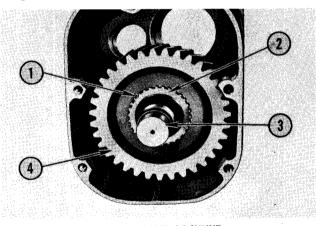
OUTPUT GEAR AND LOCKNUT 4. Gear 2. Locknut 3. Shaft 1. Setscrew
